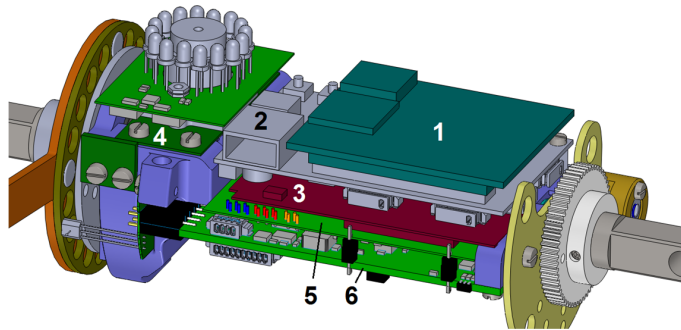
Body with its electronics: (1) processor board, (2) mother board, (3) Wifi module, (4) camera and LEDs, (5) translator, (6) function board.
